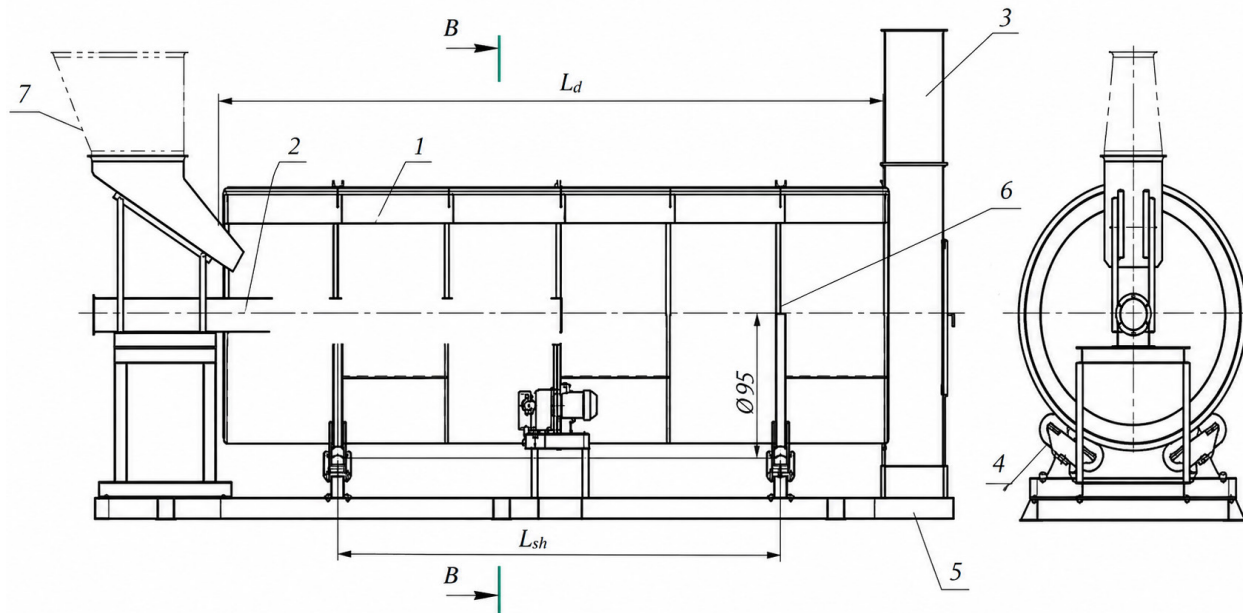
Scheme of a proposed drying drum with reduced dimensions: (1) drum shell, (2) a drying agent pipe, (3) a chimney, (4) a roller drum rotating mechanism, (5) a frame, (6) a roller guide, and (7) a cotton input tray.
